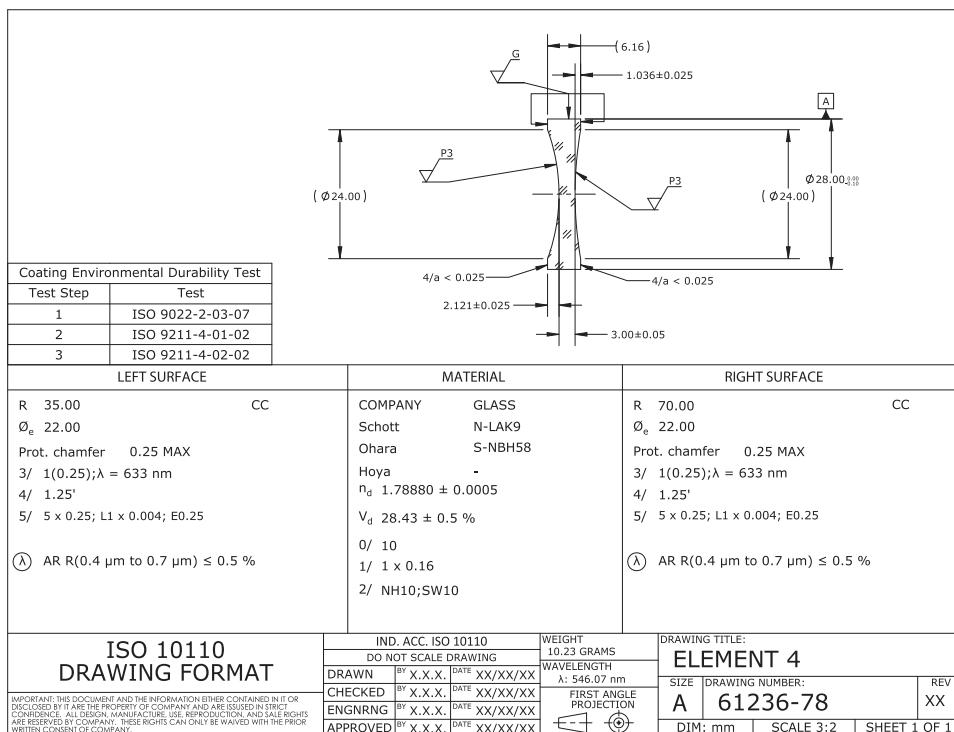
Optical system sample drawing for element 4 using the ISO 10110 drawing format.
